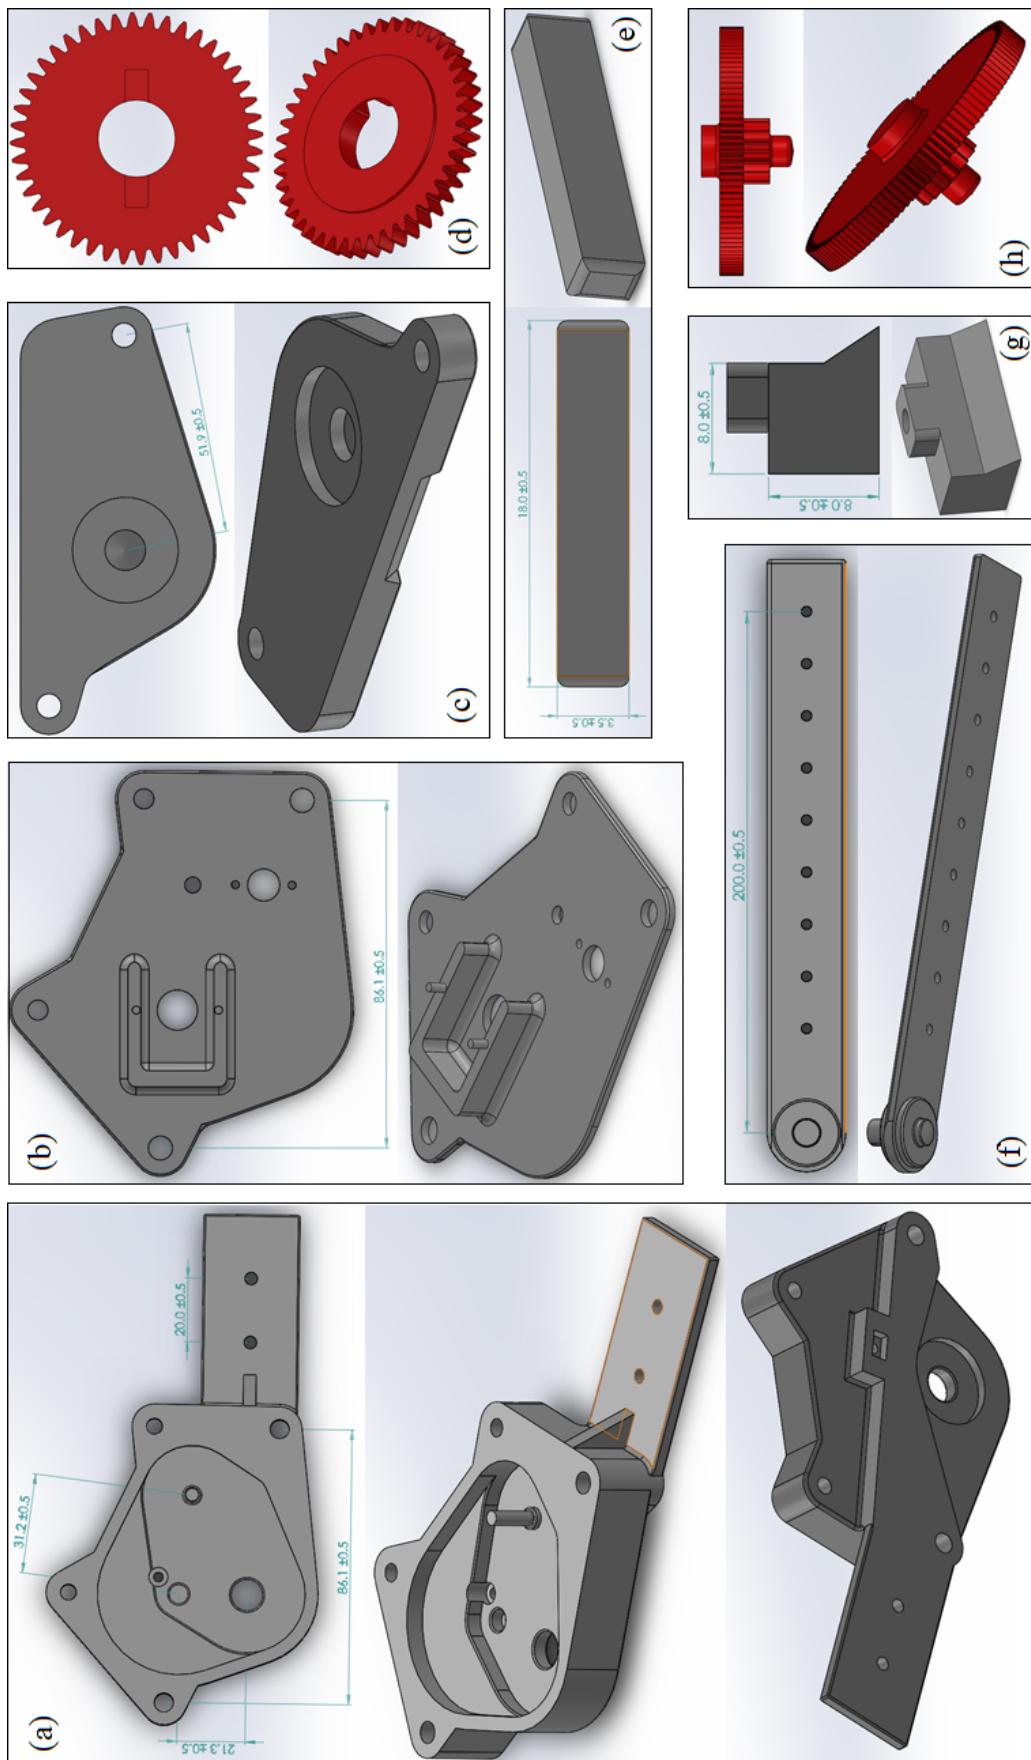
All 3D printed components of the assistive device. (a) The Gearbox Piece, (b) the Top Piece, (c) the Bottom Piece, (d) the Gear 6 Piece, (e) the Key Piece, (f) the Forearm Piece, (g) the Foot Piece, (h) the Gears 4-5 Piece.
